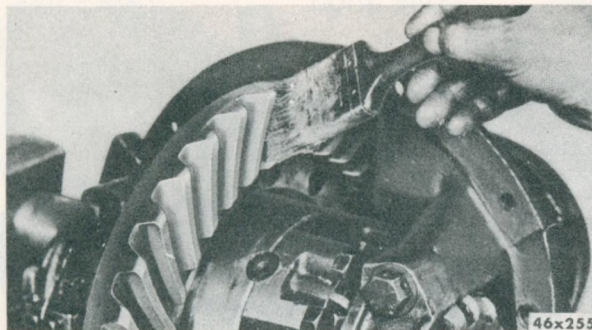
Applying Red Lead to Indicate Tooth Contact
